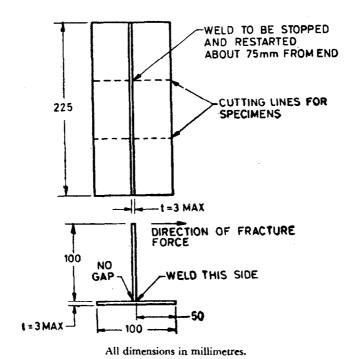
Test Piece for Fillet Weld in Sheet
